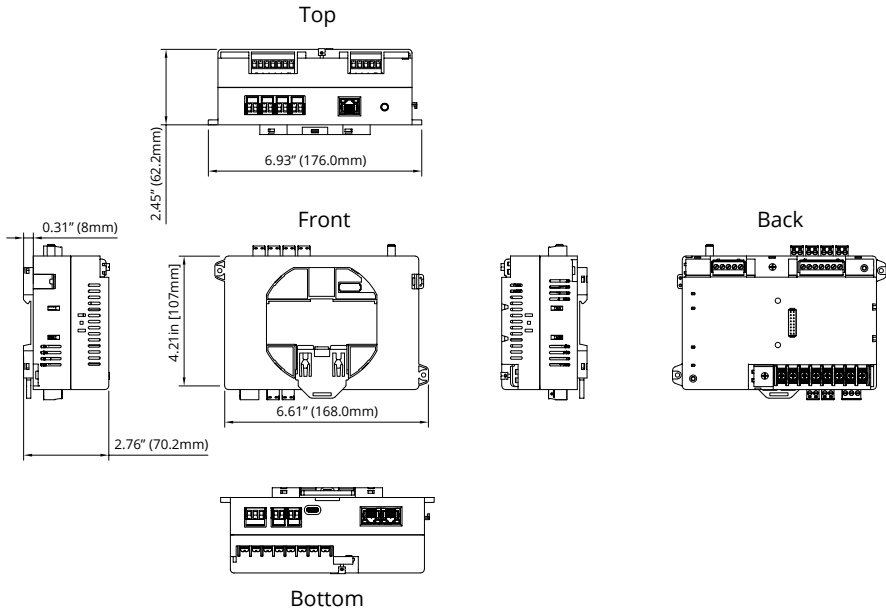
Acuvim 3 DIN Rail Mount Appearance and Dimensions
